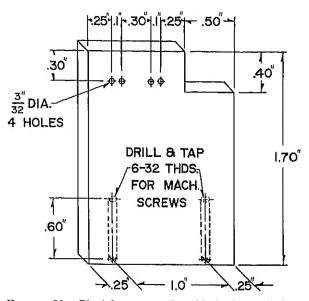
Plexiglass mounting block for switches S2 and S3.
